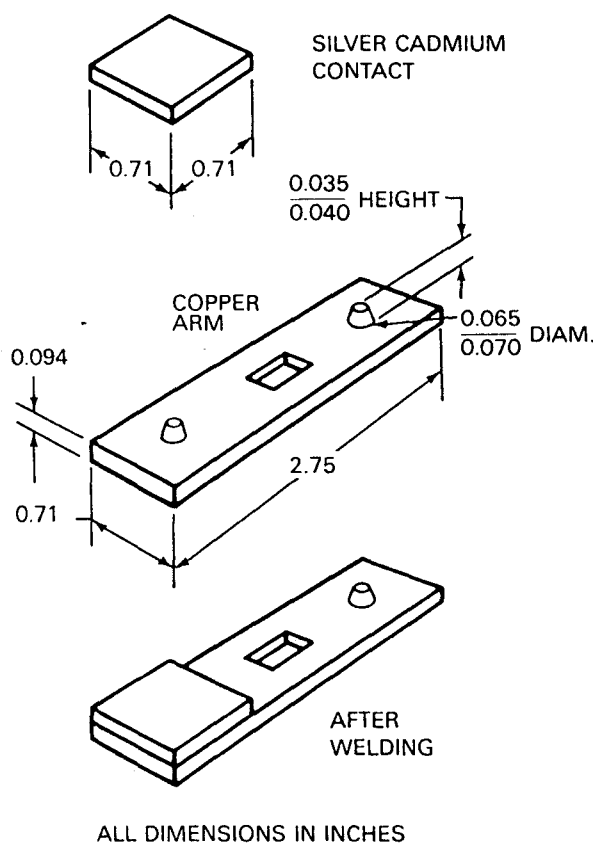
Typical Design of a Magnetic Force Percussion Welded Contact Assembly
